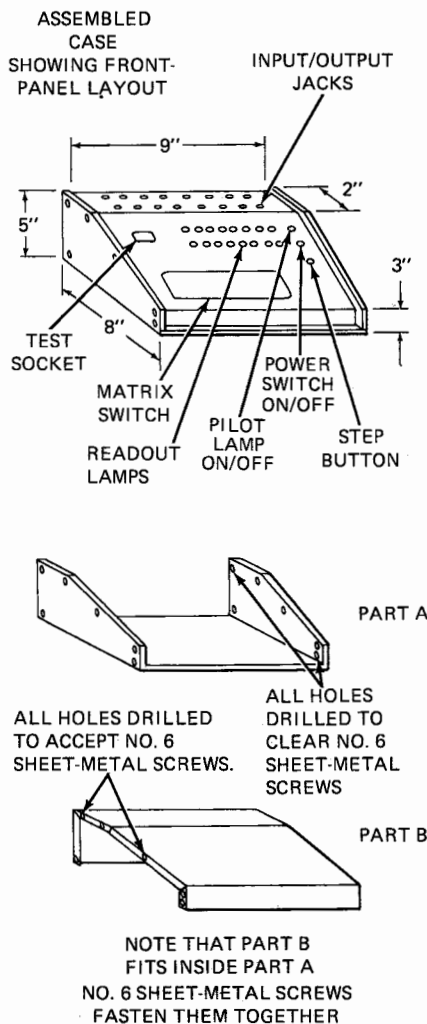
SLOPING-FRONT INSTRUMENT CASE, its dimensions, construction and how the two parts are fitted and joined together.
